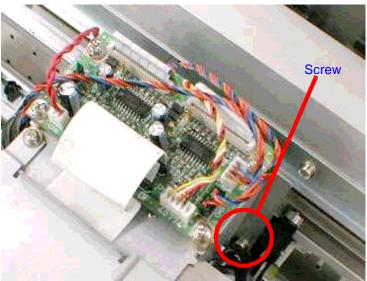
Removing the Circuit Board Mounting Frame Screws
